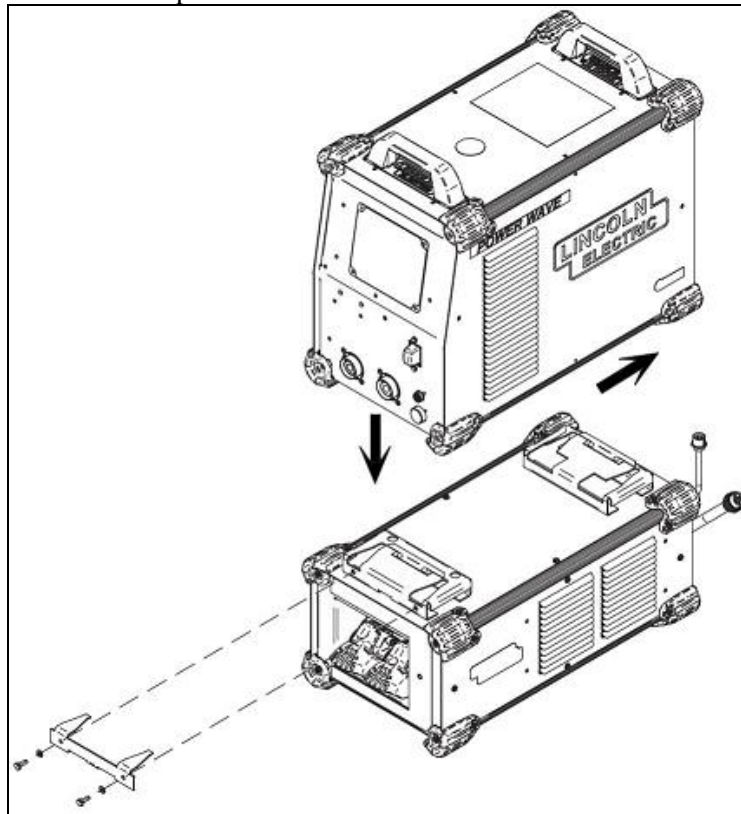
(e) Connection of welding power supply Power Wave R350, Power Wave S350, Power Wave R500 and Expansion module (1/4)
